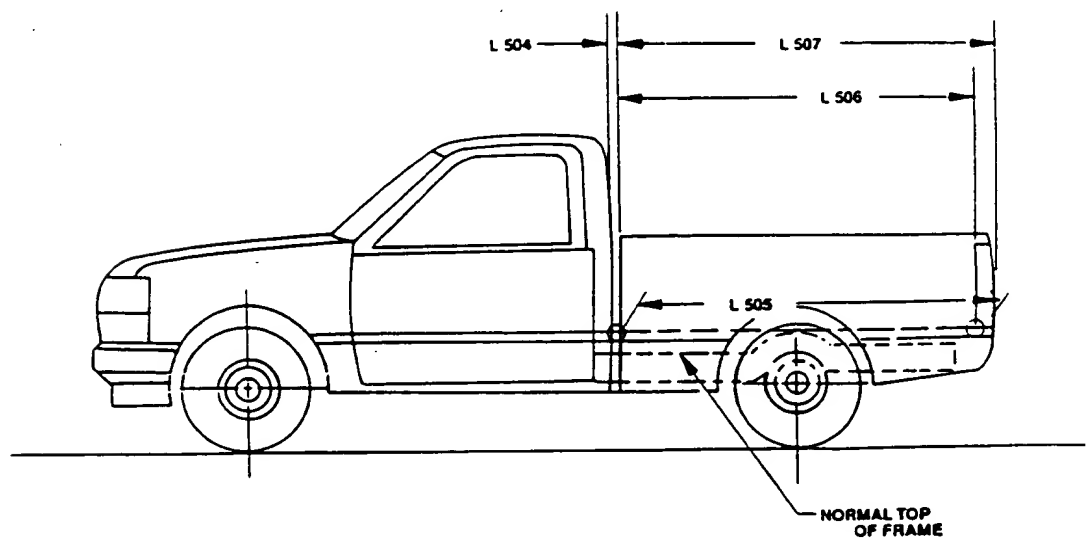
TRUCK CARGO SPACE DIMENSIONS, LENGTH
